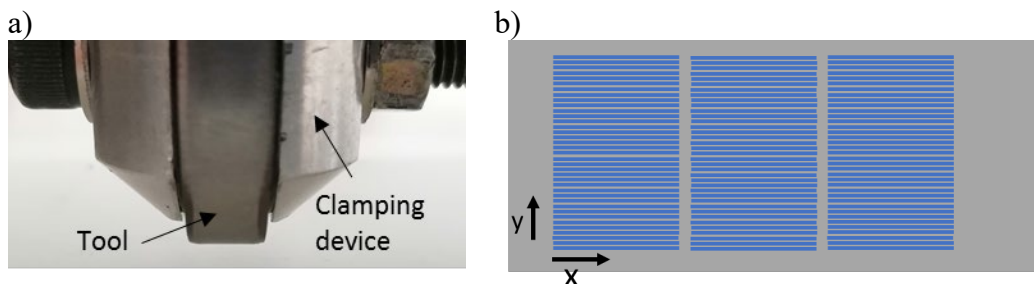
a) Photograph of cylindrical tool (half) in SOST b) Schematic view of sheet with tracks.
